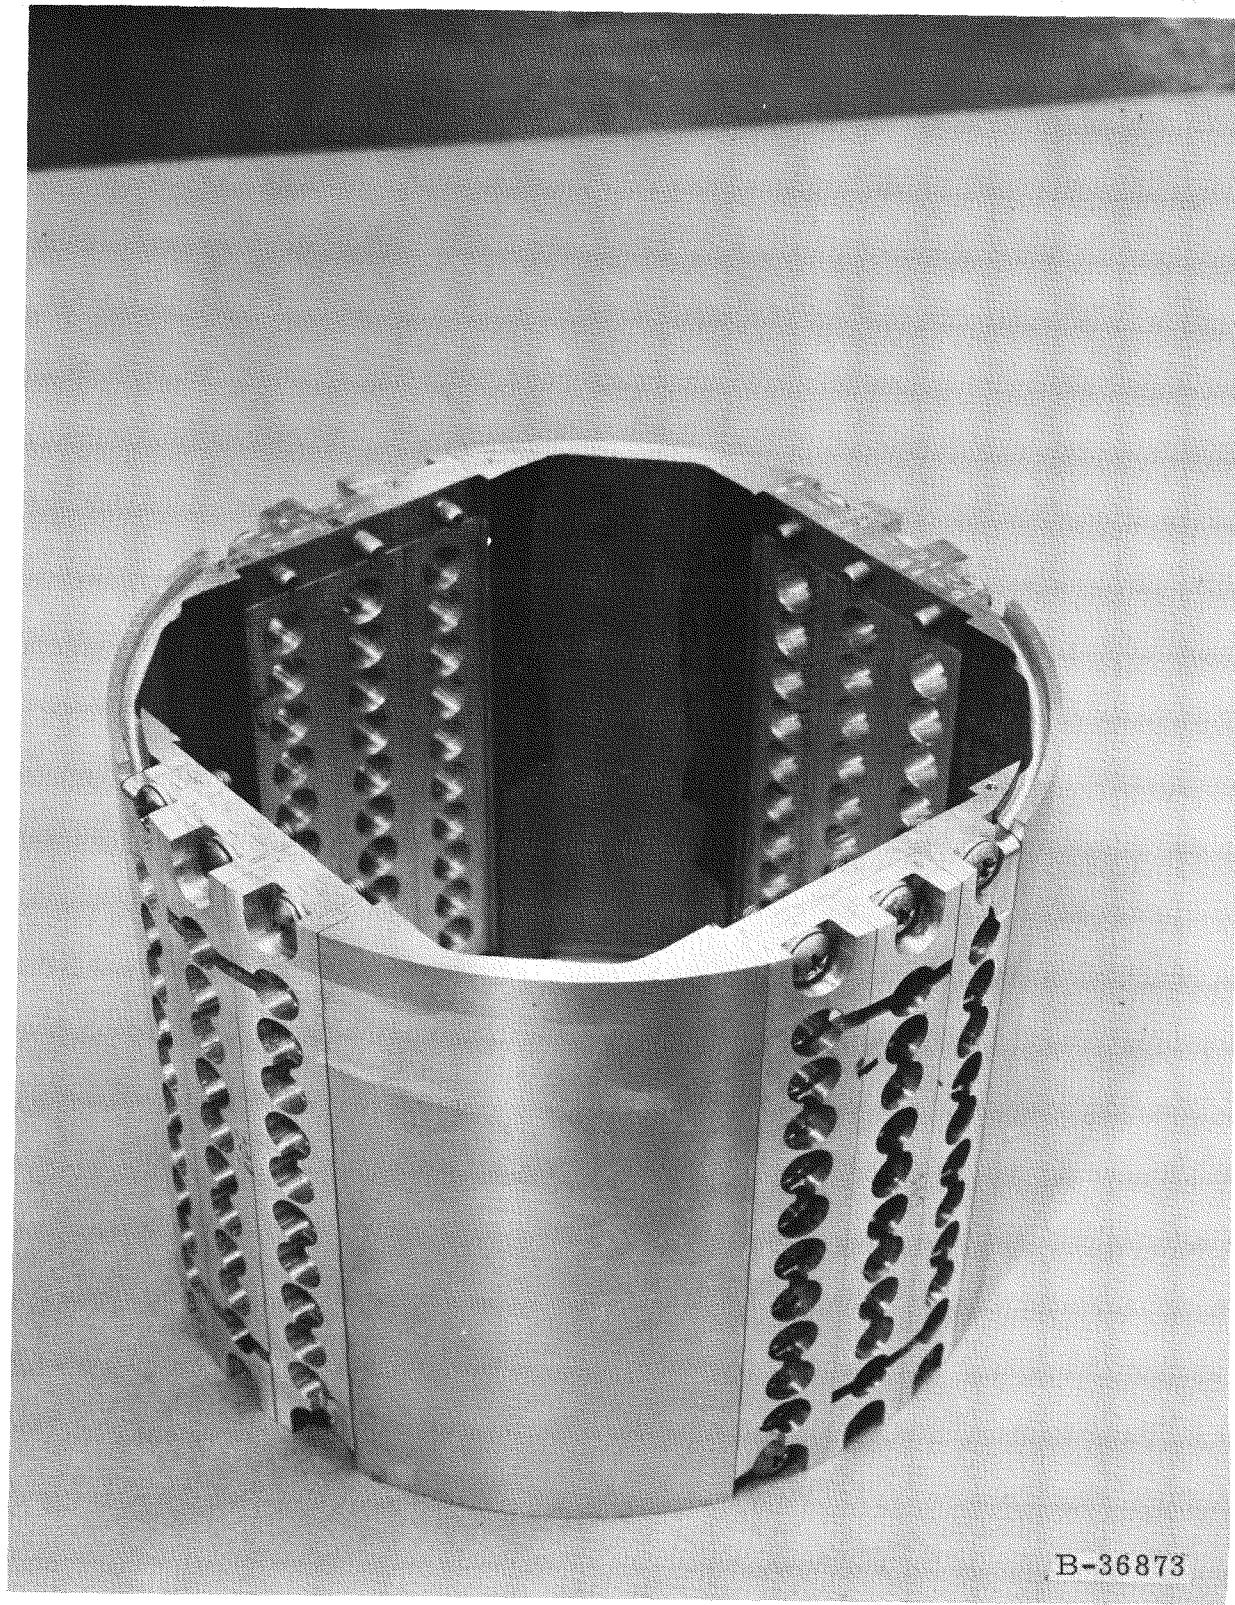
SNAP 7A and 7C Heat Sink --In-Process Dimensional Check
